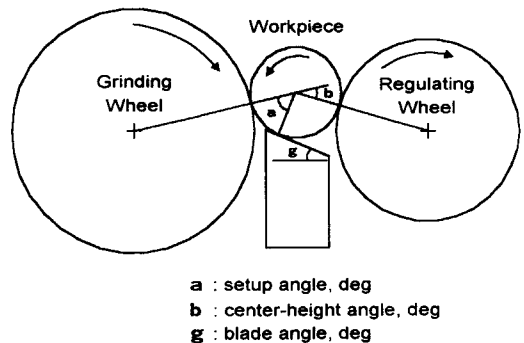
Geometric setup configuration in centerless cylindrical grinding
